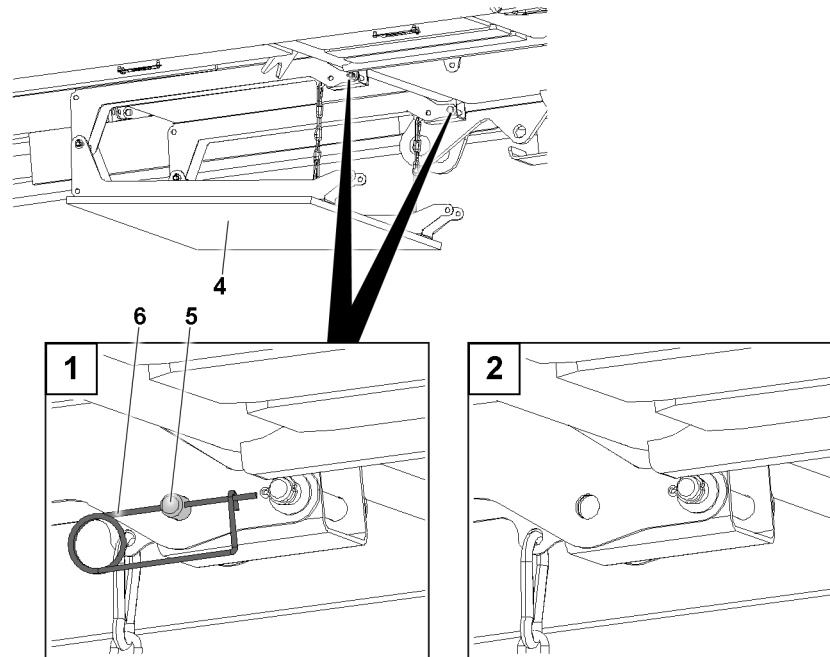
Assembling the assembly pedestal in the transport position — unpinning the platform
